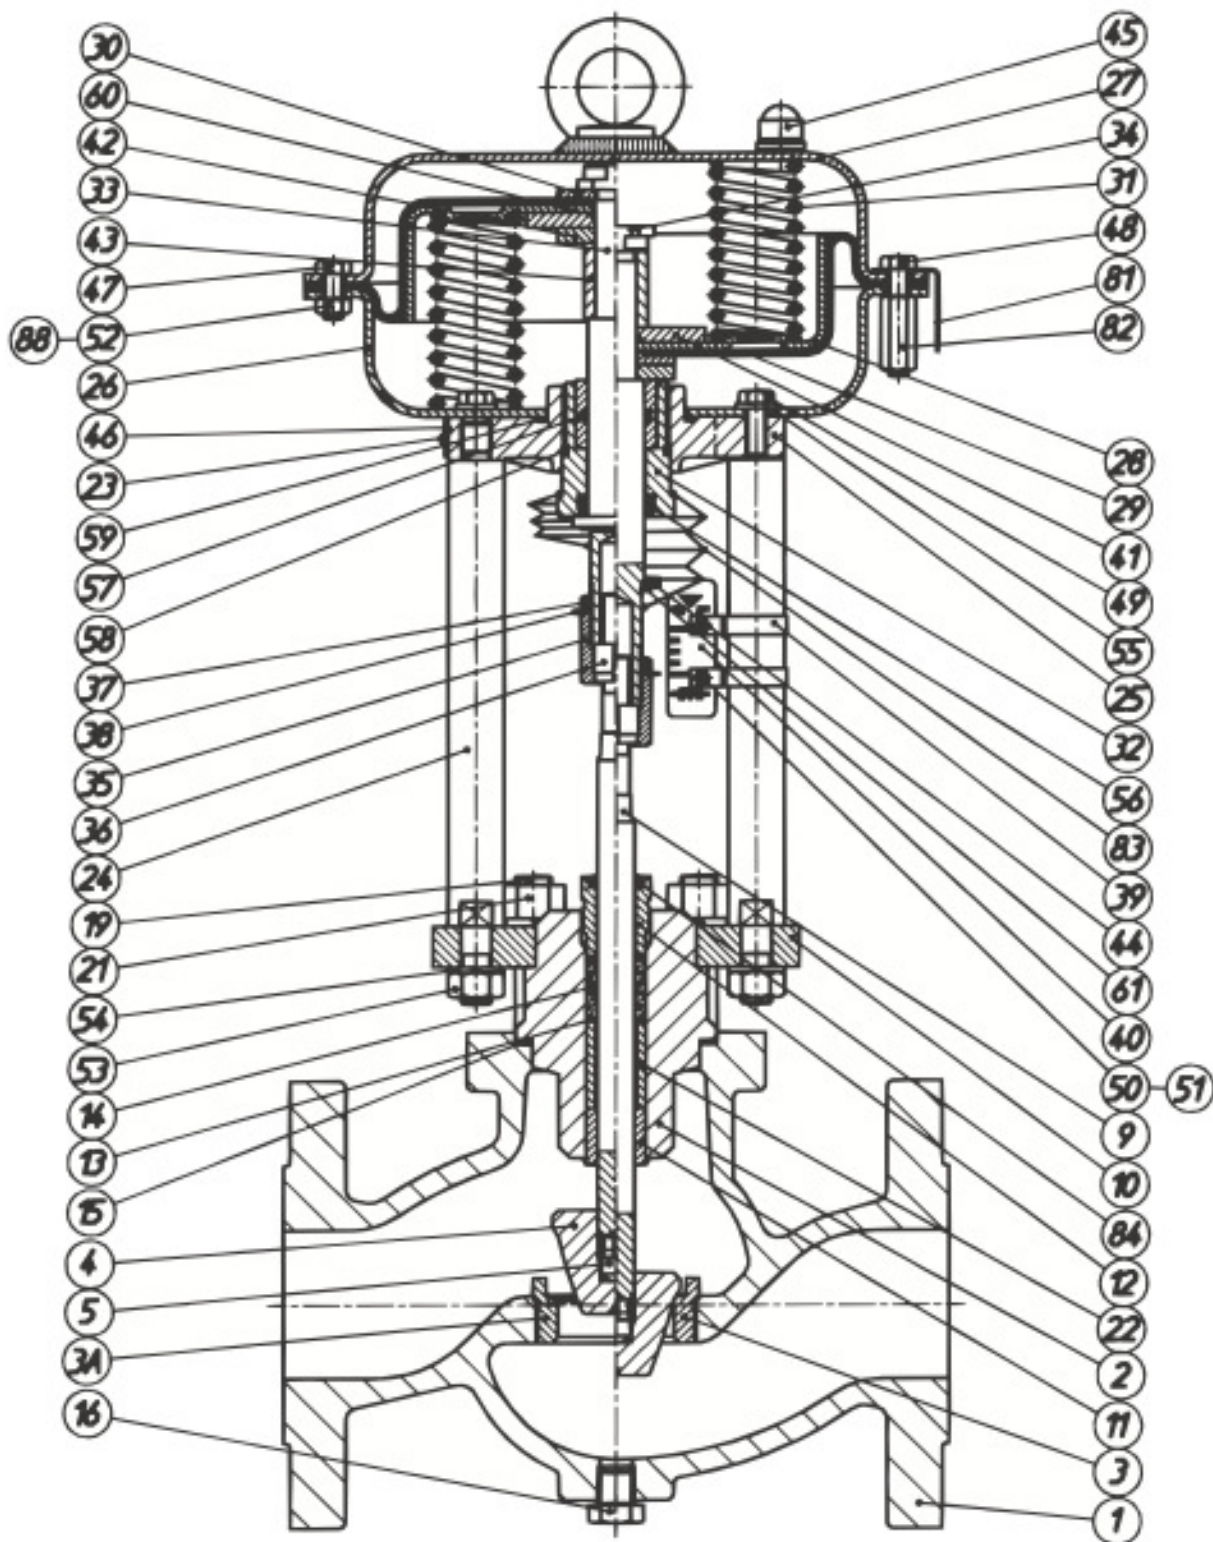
Regulator valve DN 15... 100 with valve plates Kvs = 25... 160, with pneumatic positioning drive
